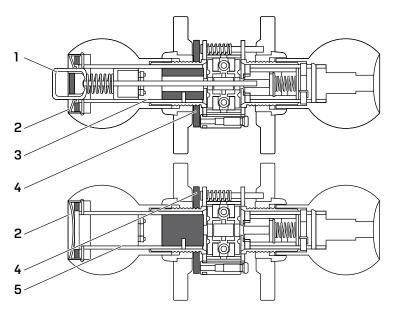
Cross-section of 8K locks showing lead-lined parts
